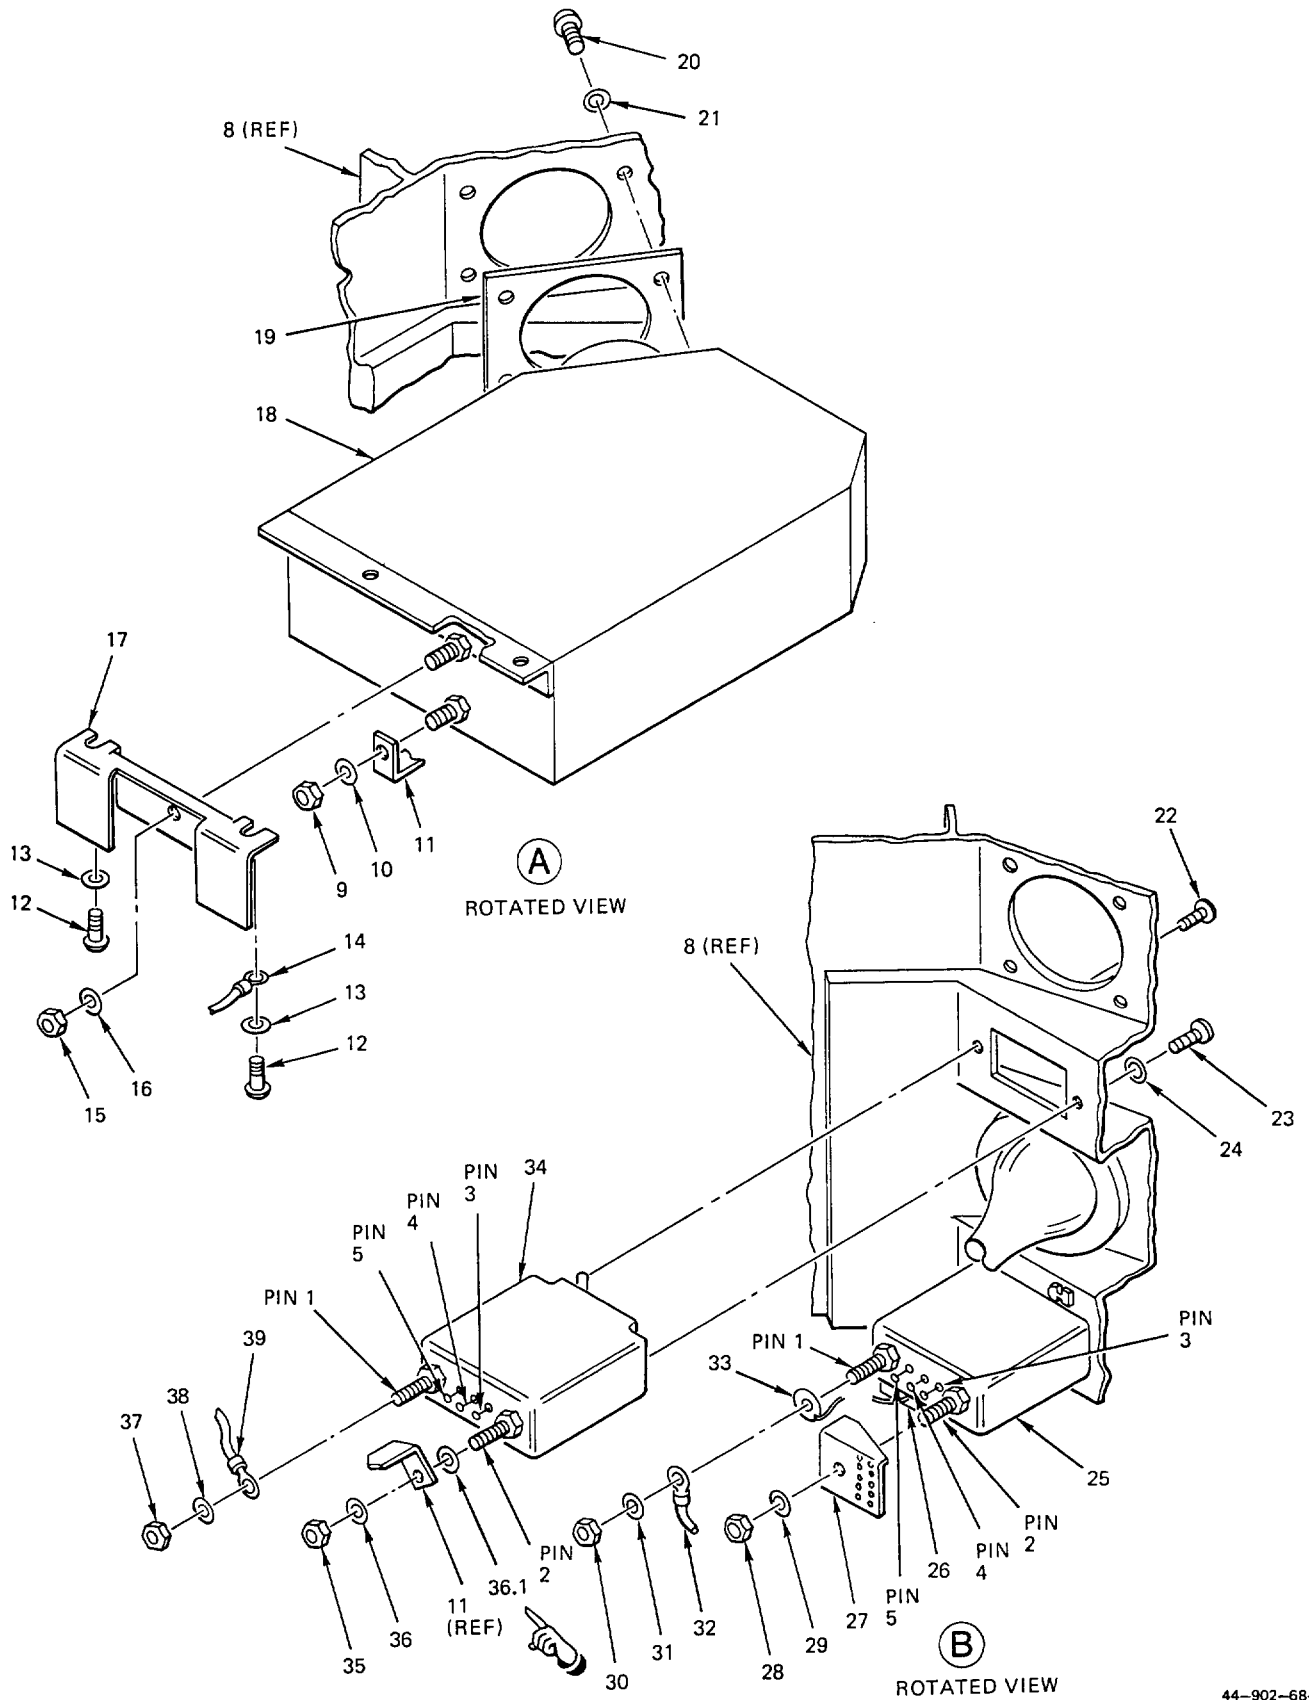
Power Supply Subassembly Exploded View (Sheet 1 of 6)
